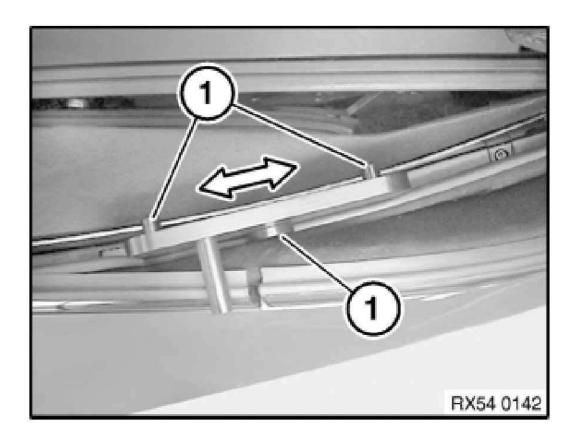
Checking Special Tool Correctly Seated Courtesy of BMW OF NORTH AMERICA, INC.
